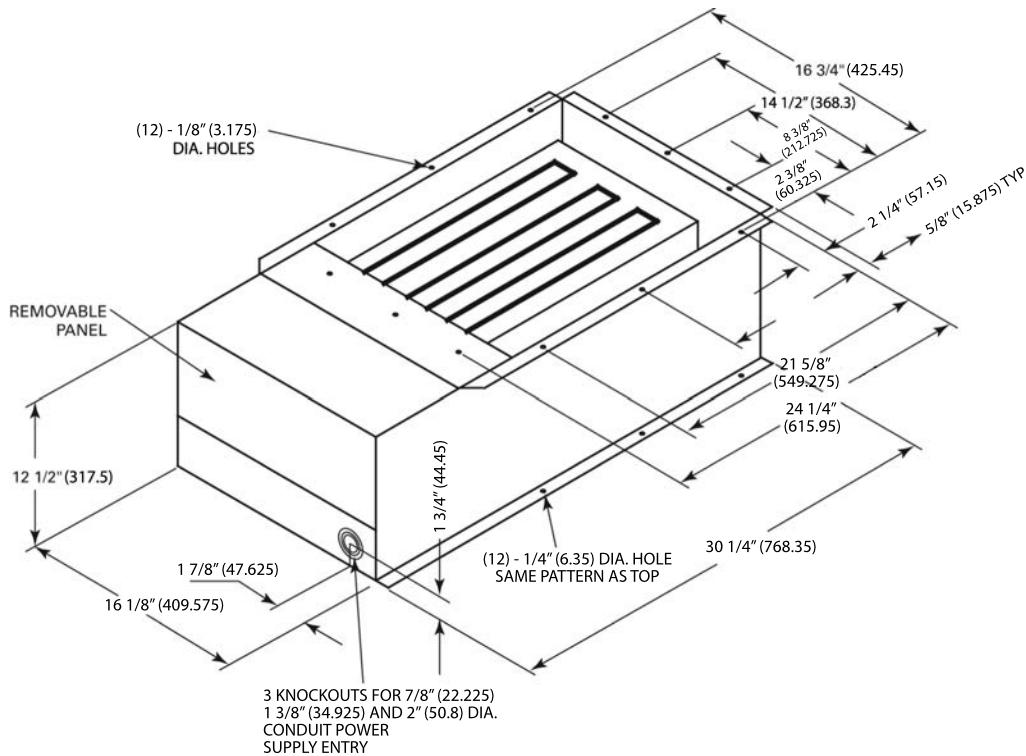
Electric heater accessory for 5-10 ton air handlers – inches (millimeters)
